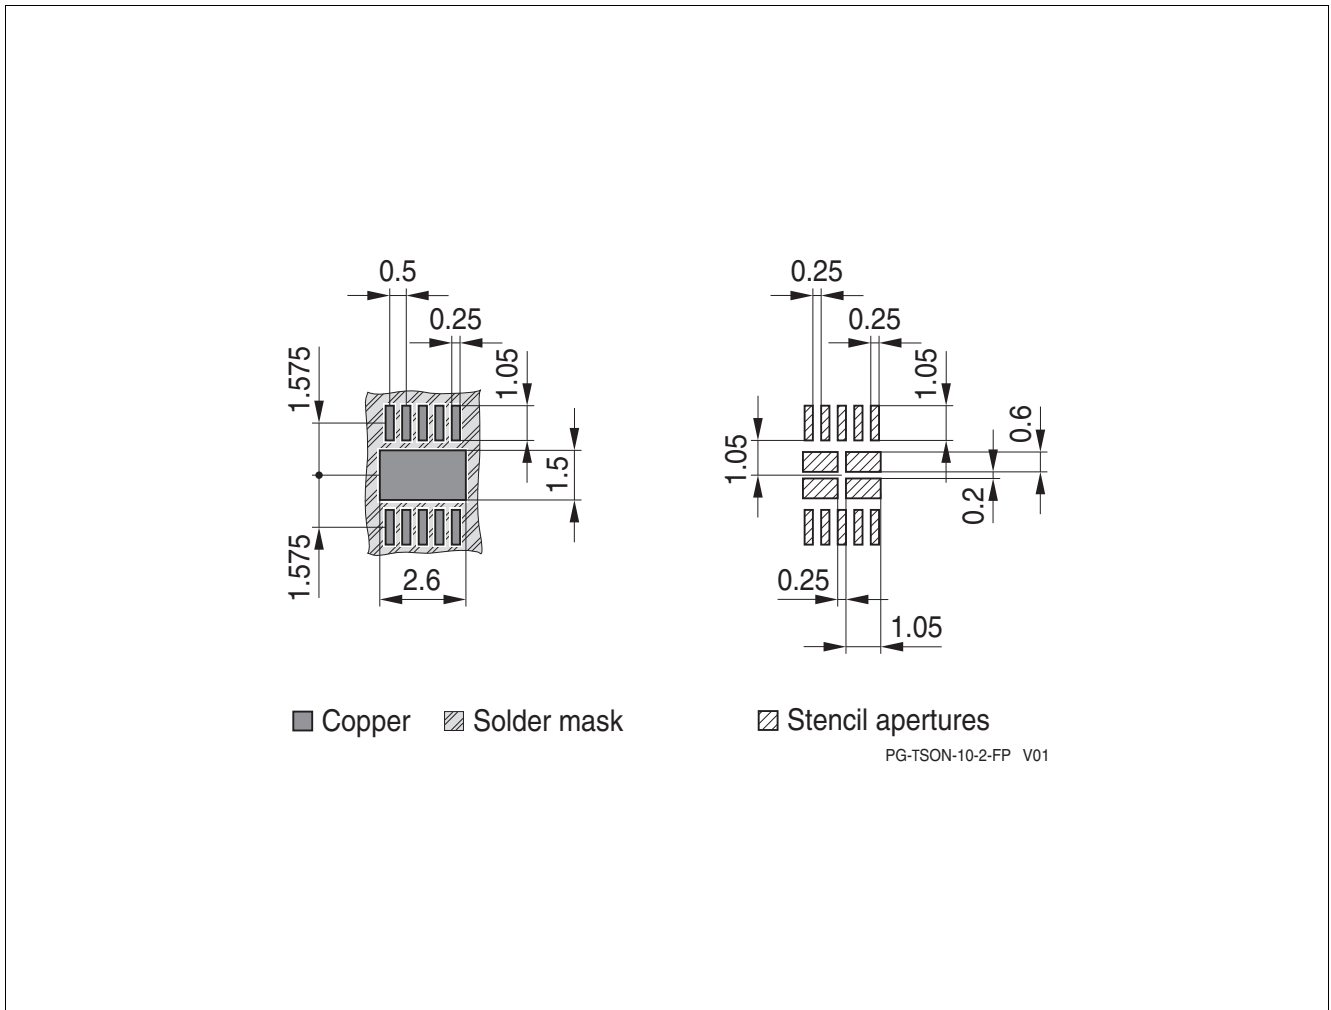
PG-TSON-10 (IFX30081LDV) Package Footprint
